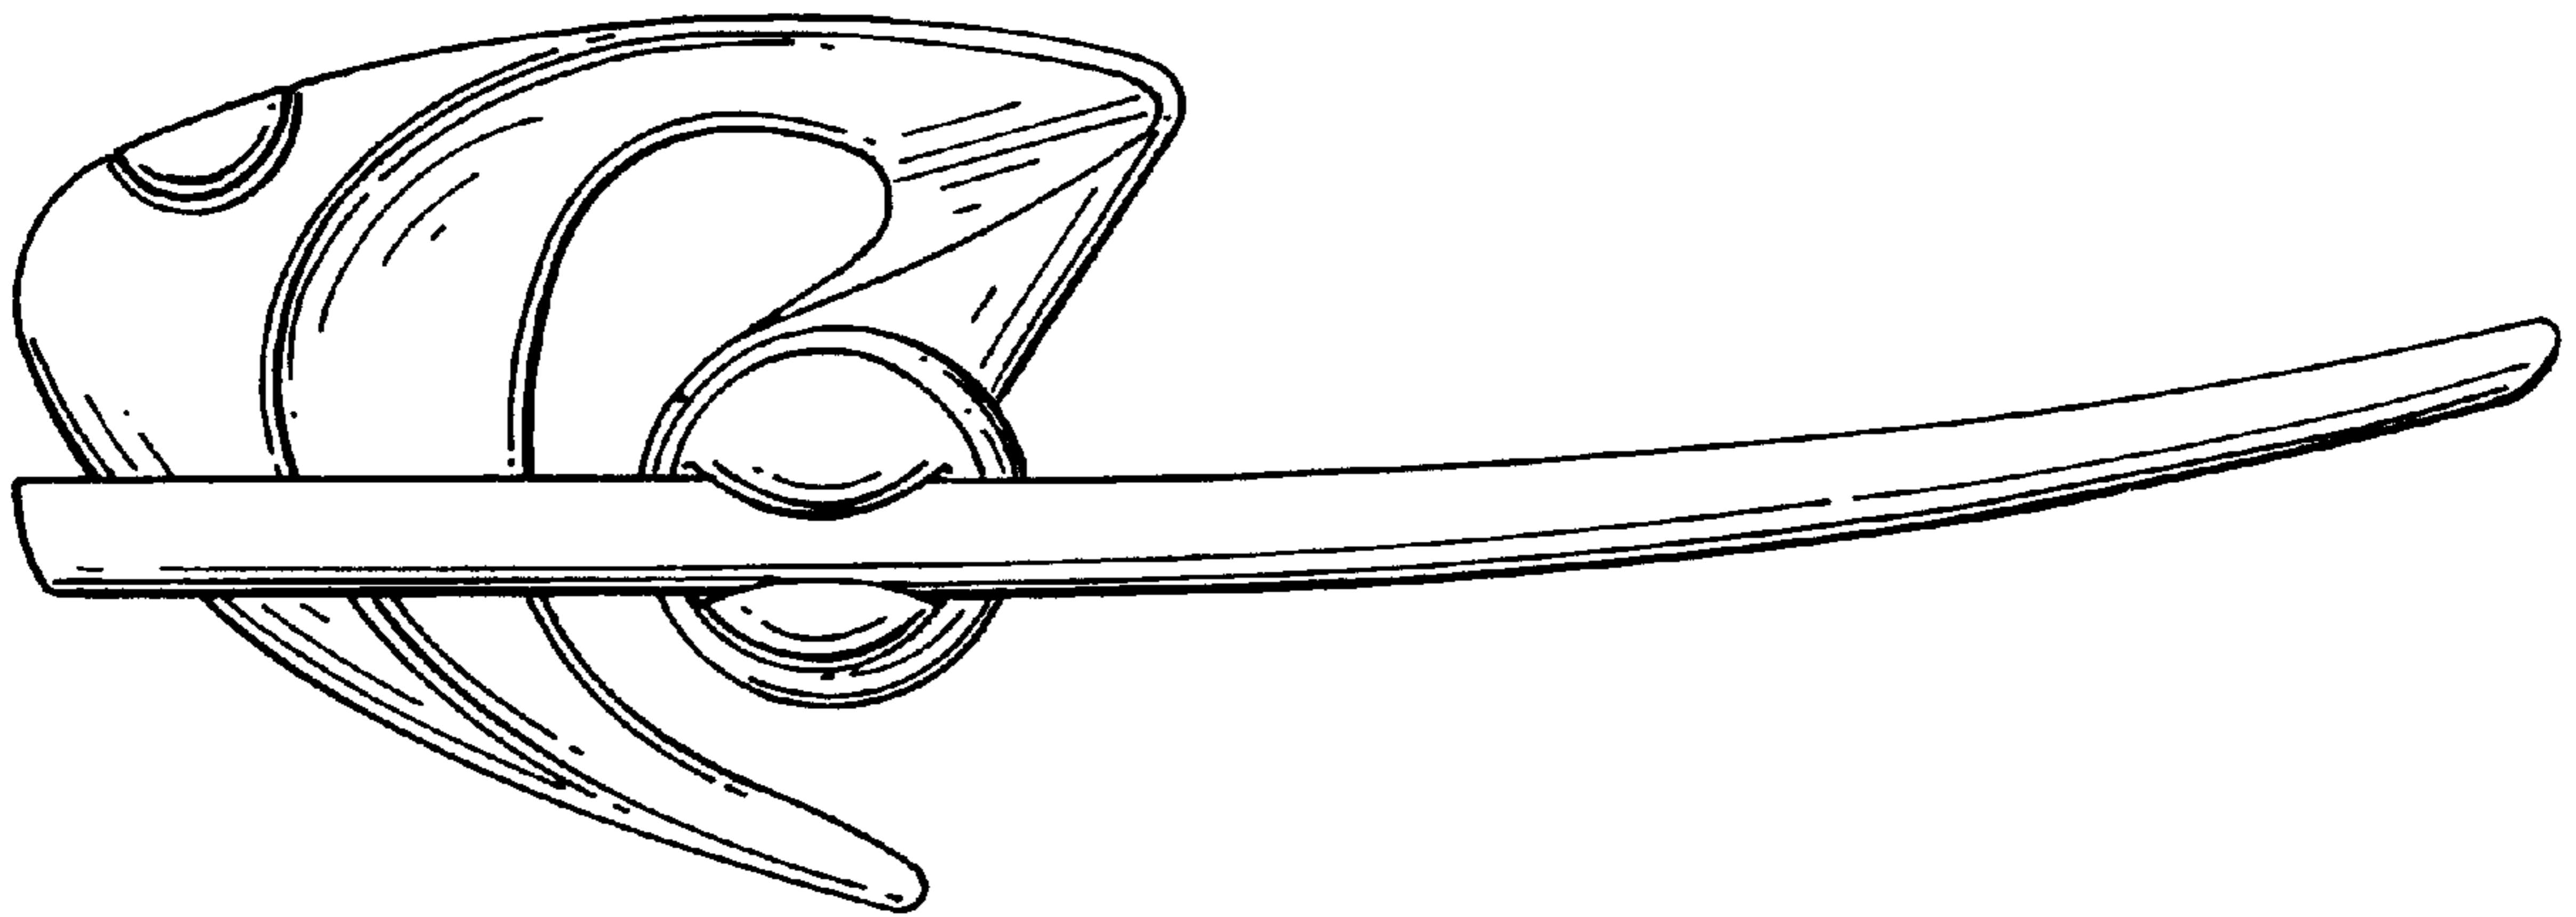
is a front perspective view of the right side of the sliding boom headset.
